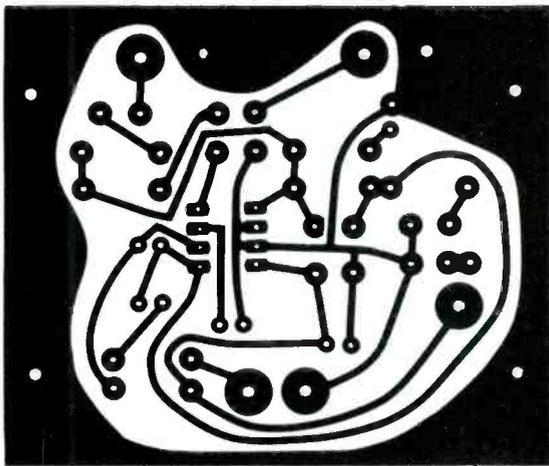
The foil pattern for the Amplifier's printed-circuit board is shown full size.
